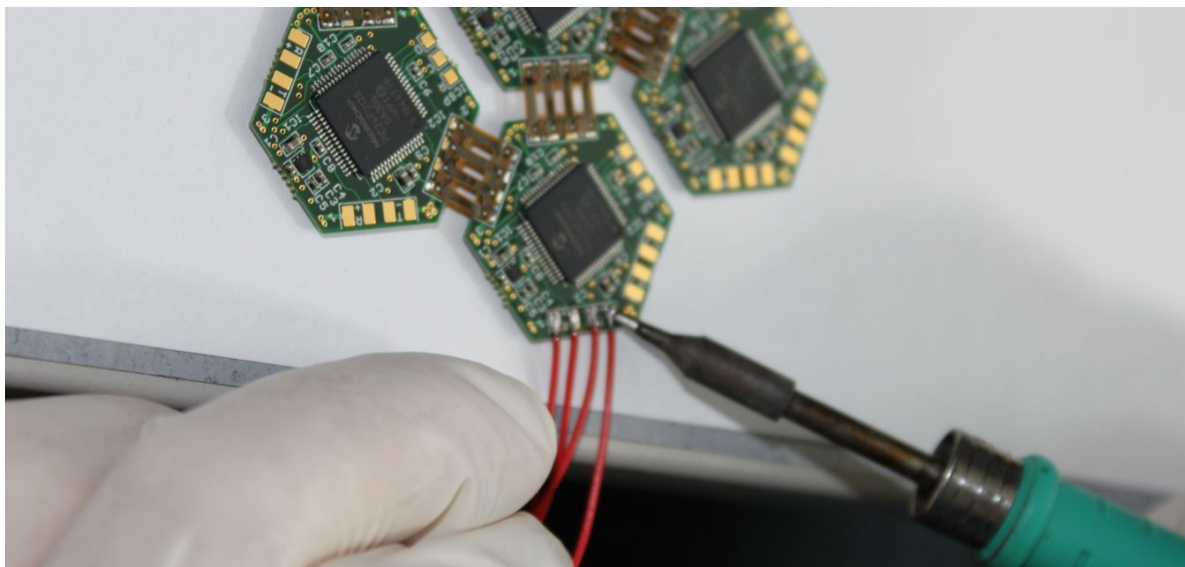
The figure shows the process of soldering interface cables to the skin patches.
